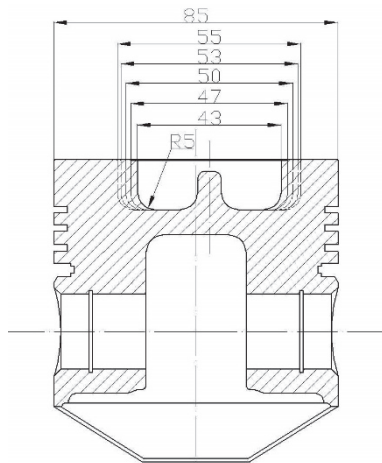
Cross-section drawing of the piston with combustion chamber (piston bowl)
